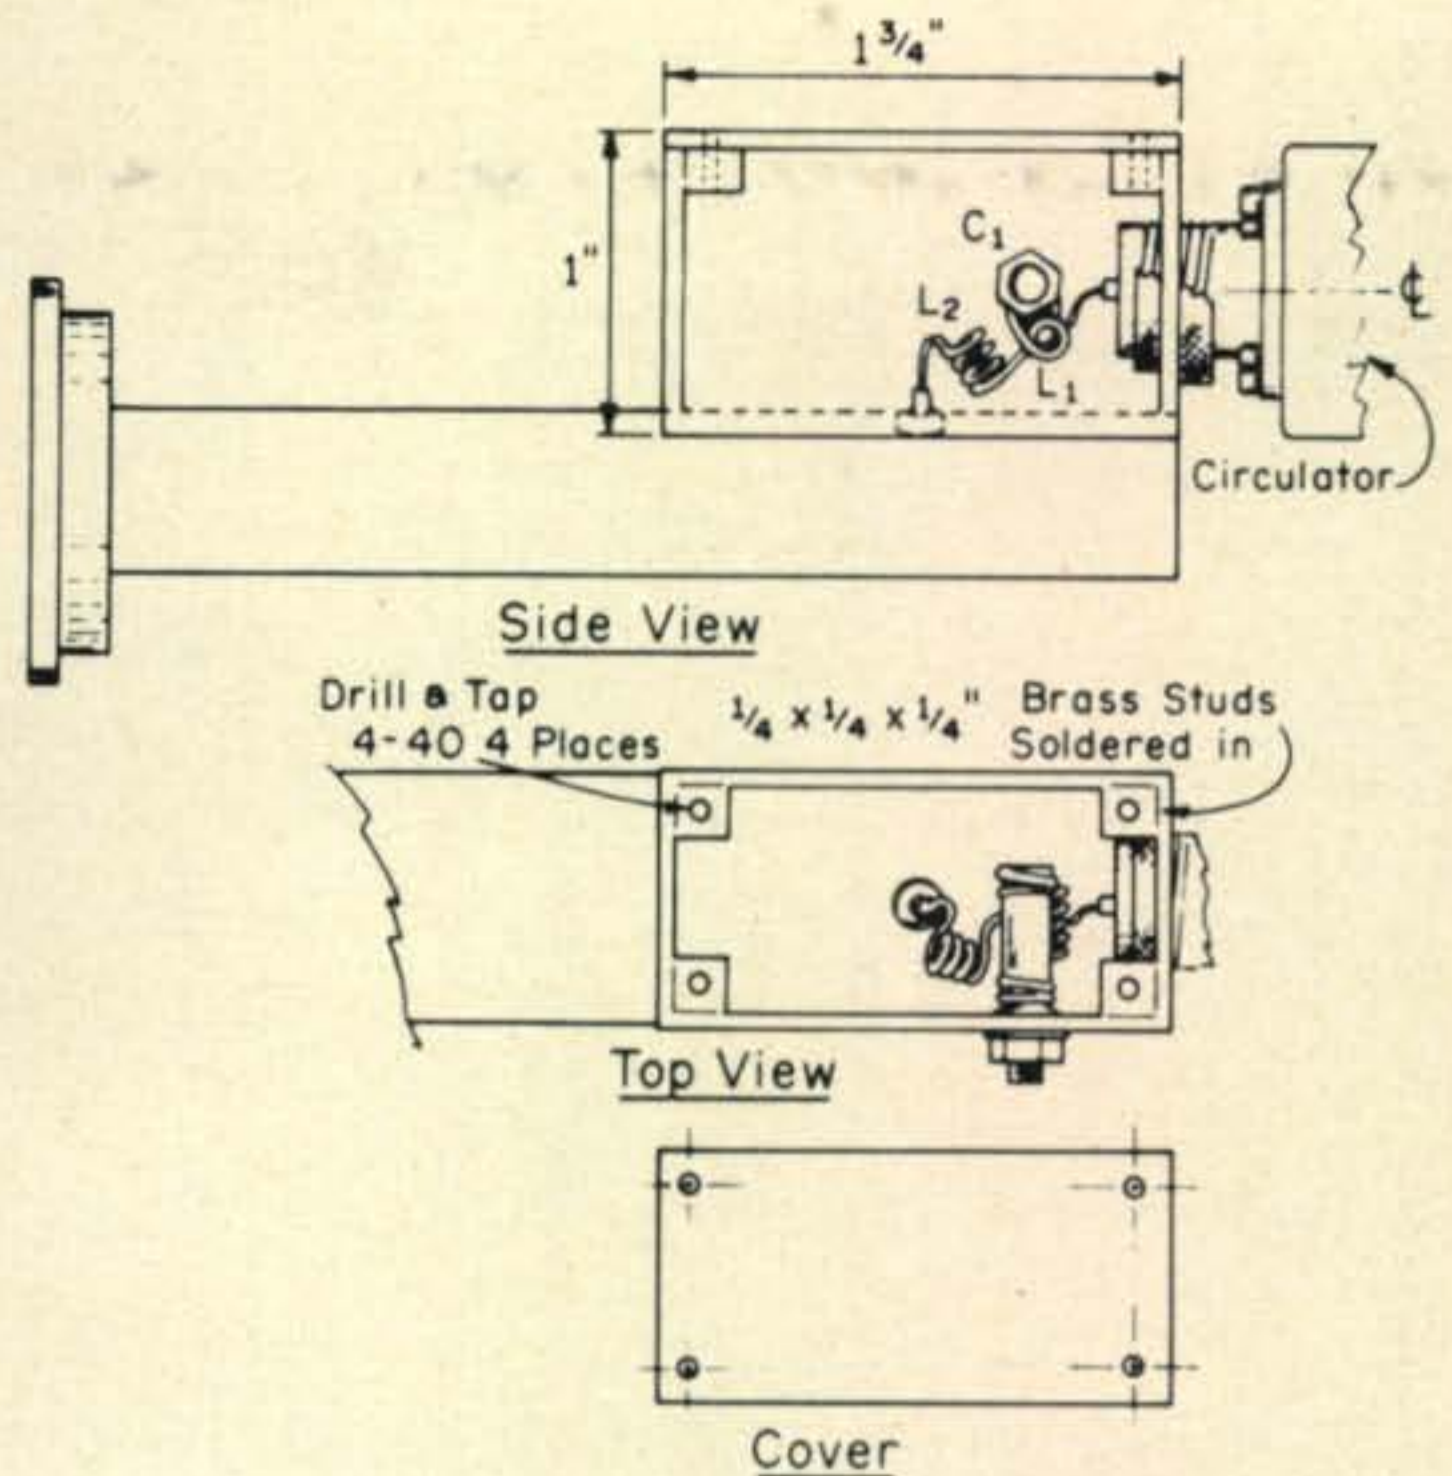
Location, details and dimensions of the enclosure containing the impedance matching network and which mounts the circulator.
